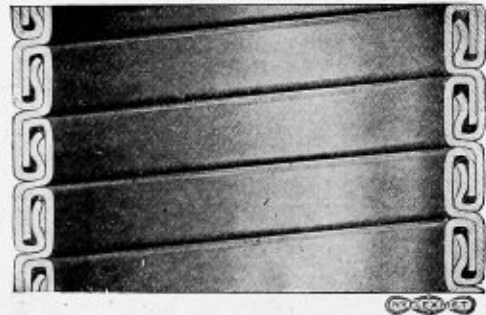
SECTION OF HOSE SHOWING FLEXIBLE CONSTRUCTION.
